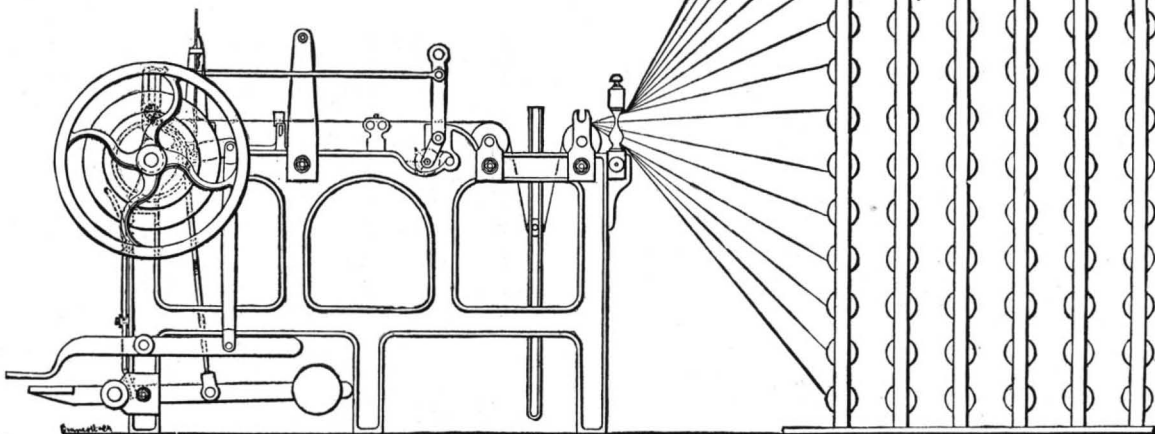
HALL'S WARPING MACHINE—SIDE VIEW.
